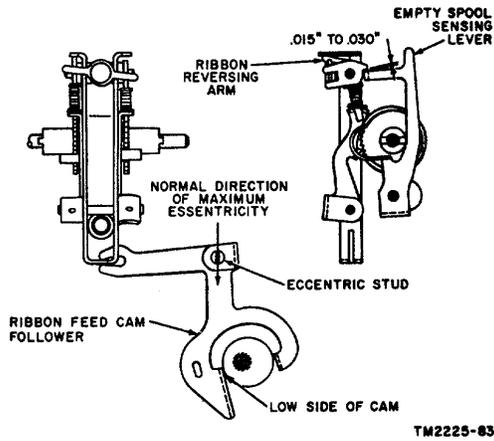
Cam follower eccentric stud adjustment (TT-76/GGC).
